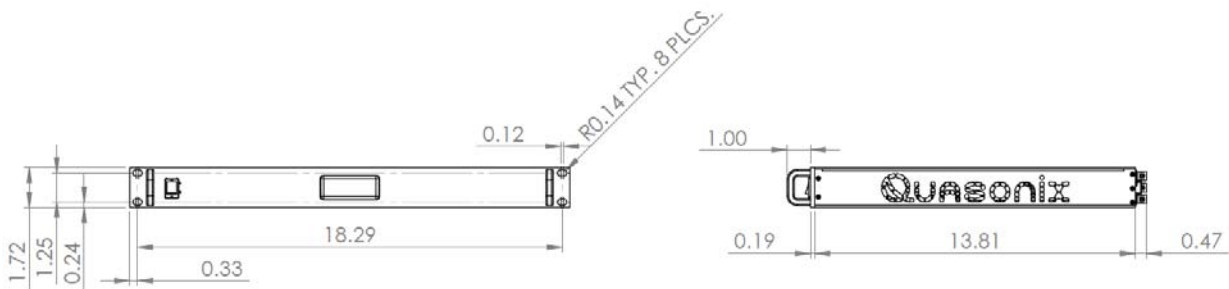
Mechanical Drawing – 1U Front and Side Views - EVTM 1U Rack Mount Encoder/Decoder
